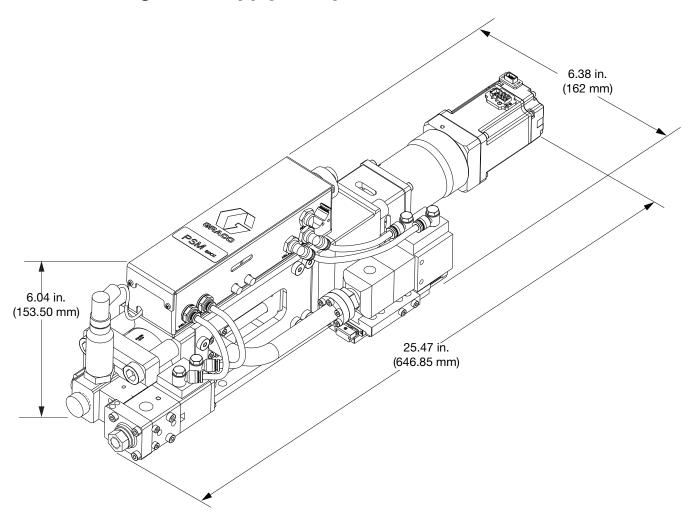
PSM Metering Unit Dimensions, 50 cc
